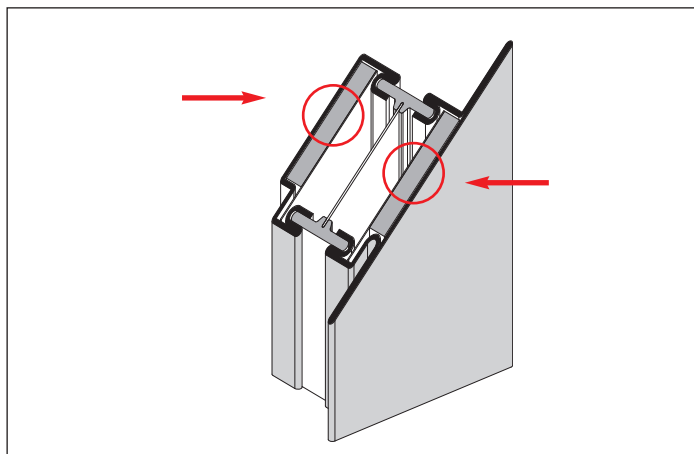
Welding edge preparation for Janisol 2 / C4
